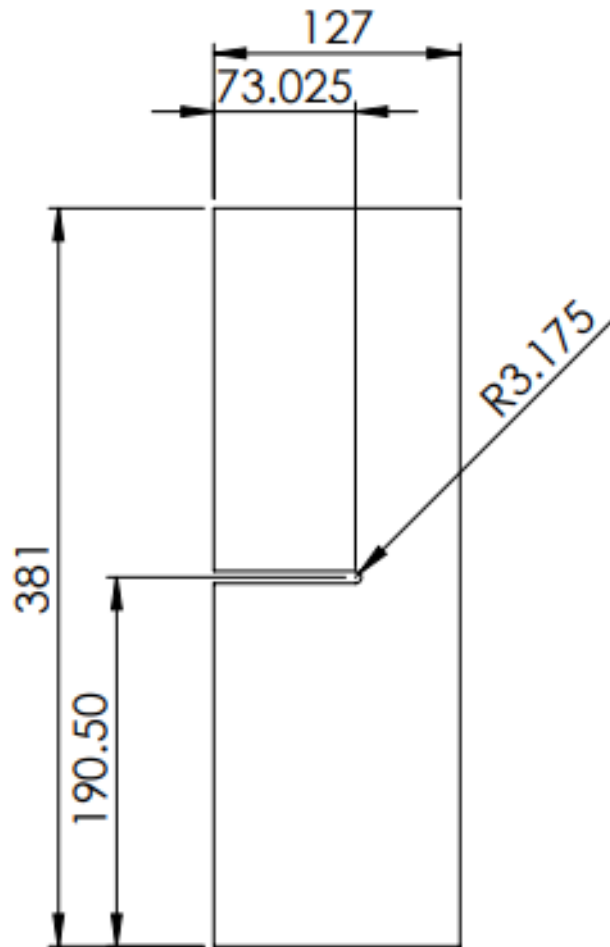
ENC specimen iteration 1 (dimensions in mm)
